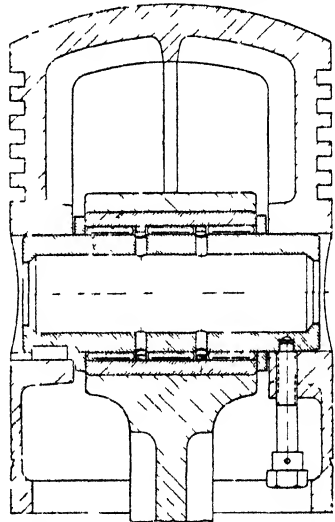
Diesel Piston with Needle Bearings for the Connecting Rod Small End.
